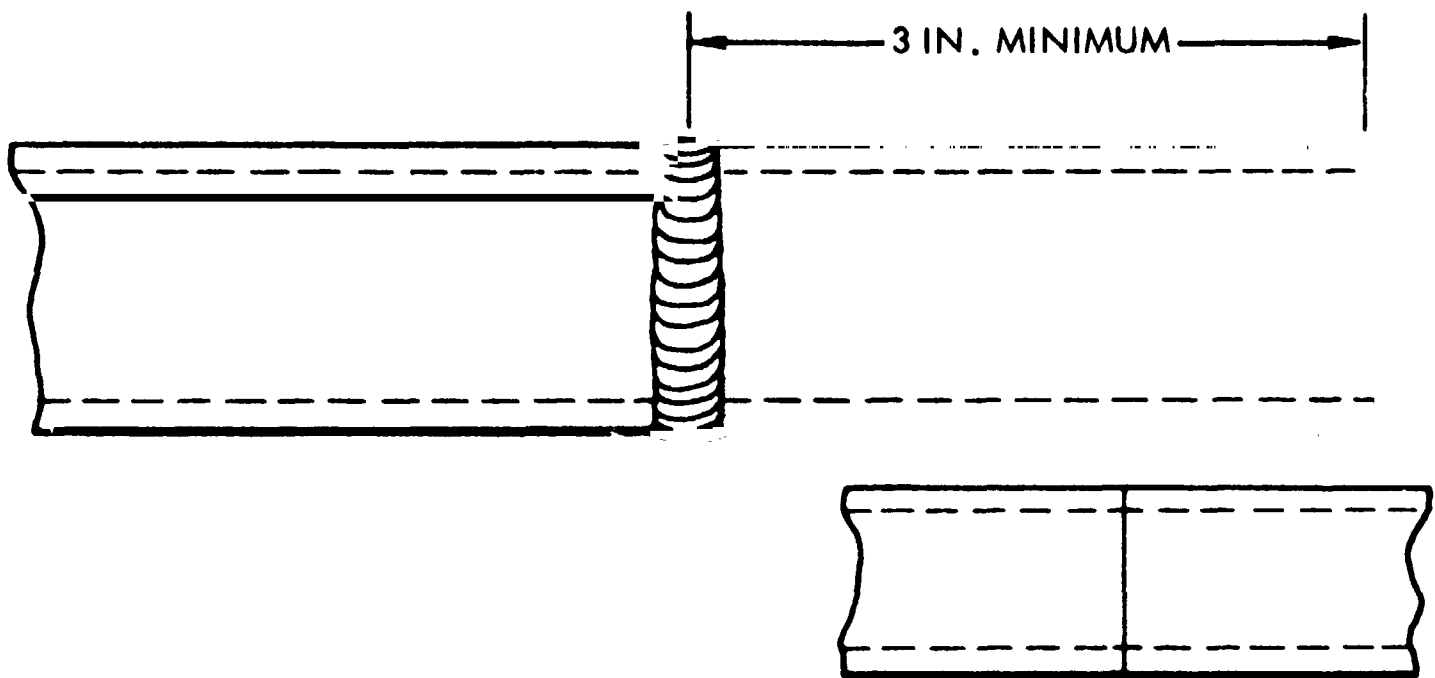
Butt-Weld Joint Specimen - Tubing (Manual and Machine)
